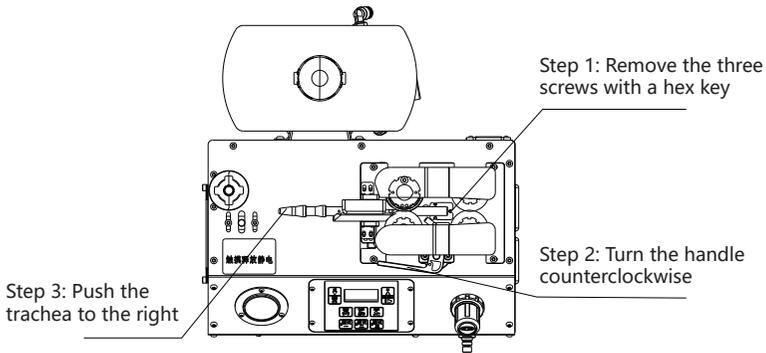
(Diagram of Air Tube and Blade Disassembly and Installation)
